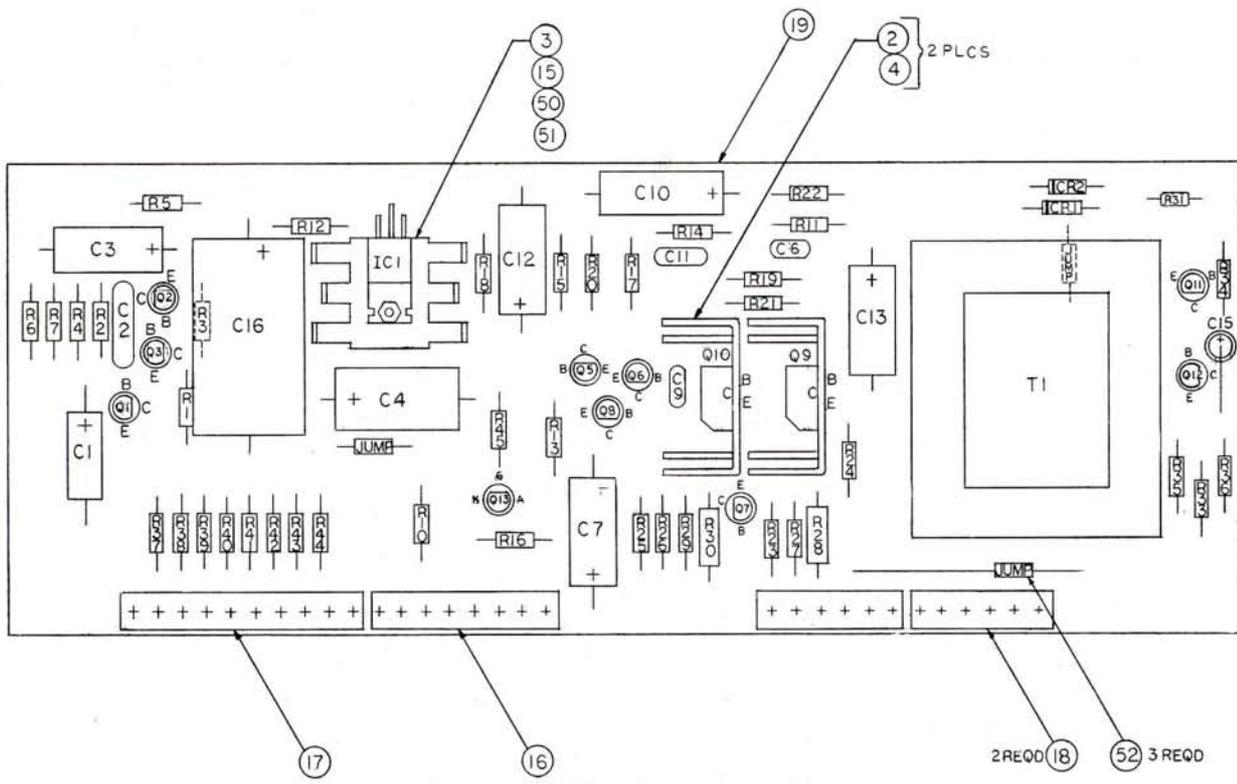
Electronic Part Locations (3C484-4), Power Amplifier PCB Assembly
